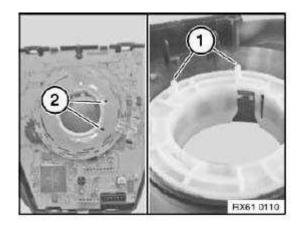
Identifying Guide Pins Of Volute Spring Courtesy of BMW OF NORTH AMERICA, INC.
